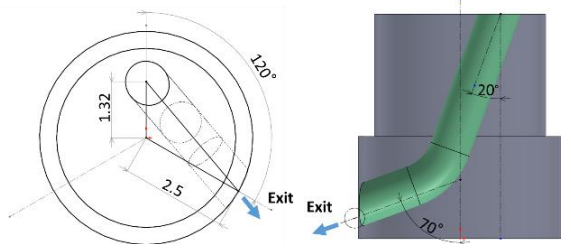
Extrusion route (Left: bottom view, Right: side view)
